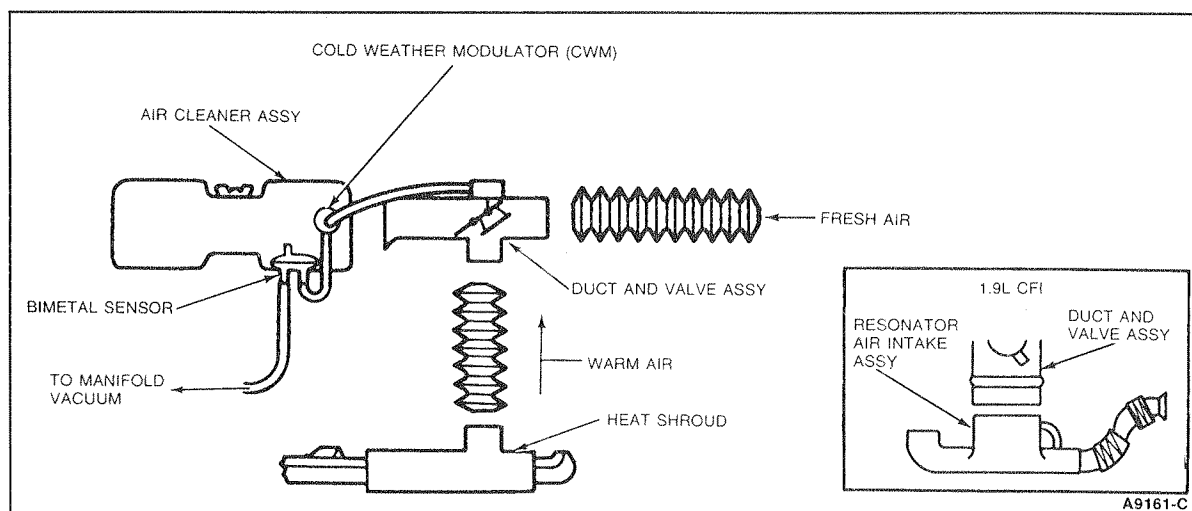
Typical Air Cleaner and Duct System, Carburetor and Throttle Body Applications — 1.9L, CFI, 5.8L (Passenger Car); 2.0L, 5.0L (Light and Heavy Duty Truck)
